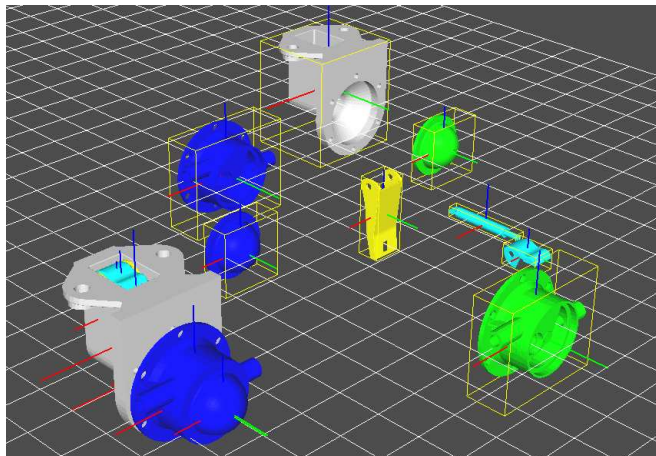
Different parts for the assembly of a pump: body, bottom, push rod, axis, lever and top cover.
